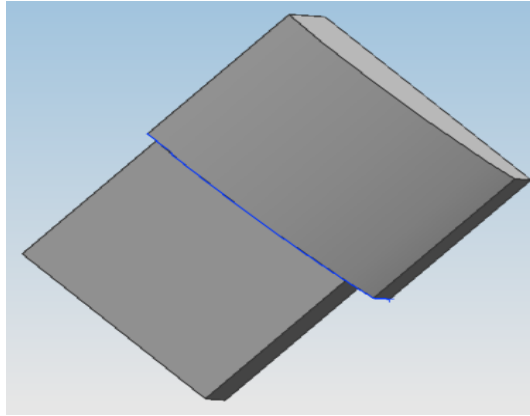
CAD Model of the Metal insert used for Pull Tests
